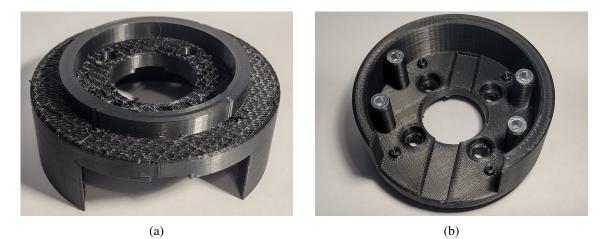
3D Printed Bottom Part of the Master Side Interface.
